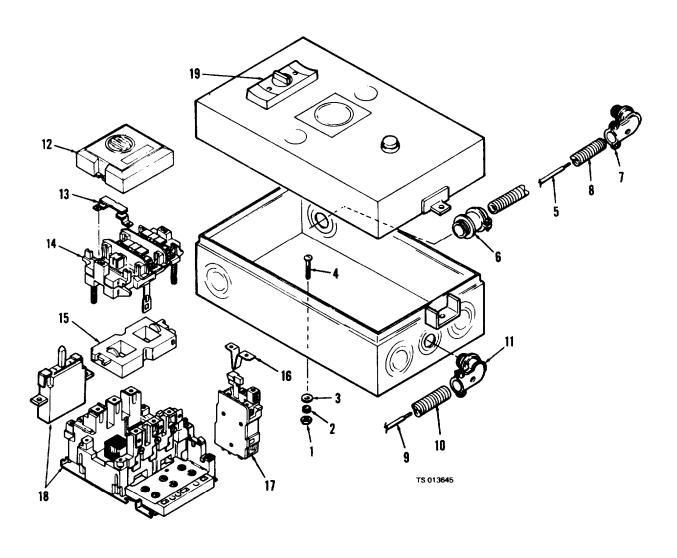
Magnetic starter, removal and installation (shown with cover removed).
